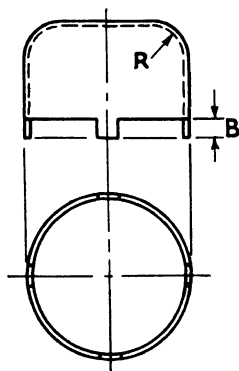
A finished trimmed shell with four projecting prongs. This shell is made from the one shown in Fig. 172.
